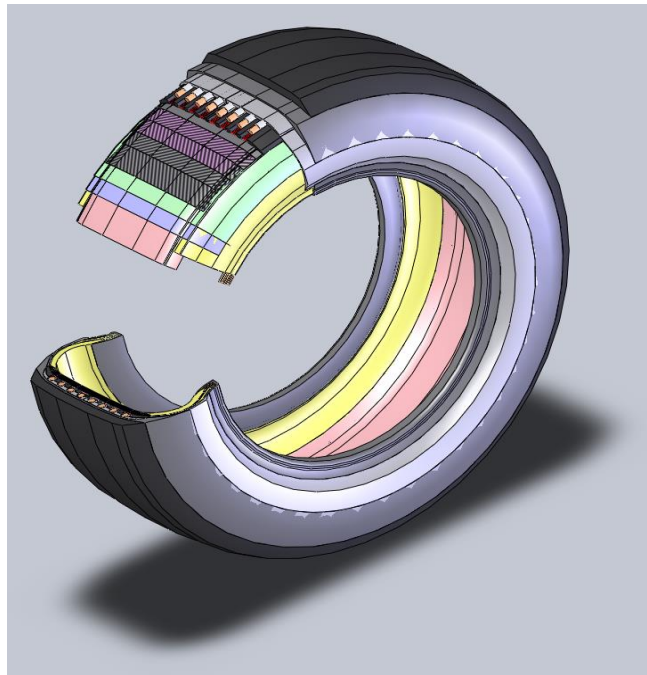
SECOND CUT-OUT VIEW--37X12.50R17 PRESSURE ZERO TIRE
